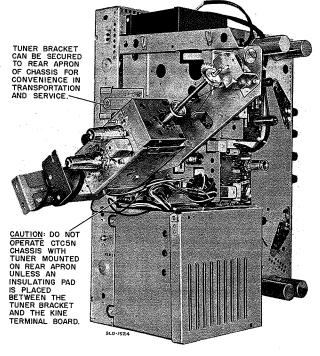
Tuner Unit Mounted on Chassis for Transportation
